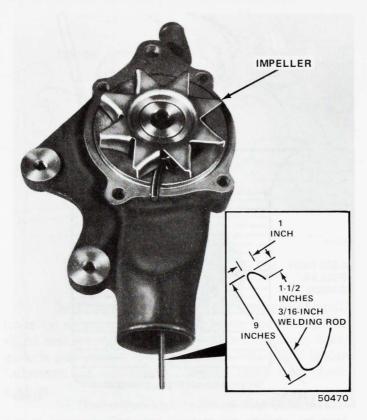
C-11 Checking Water Pump for Loose Impeller—Typical
